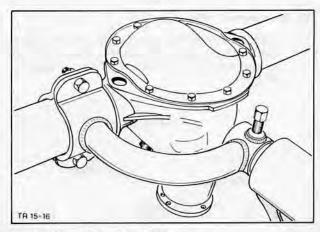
Mount rear axle on stand 'F' + 'G' axle mounting stand 15–057 'H' axle mounting stand 16–009 Use in conjunction with 21–023
